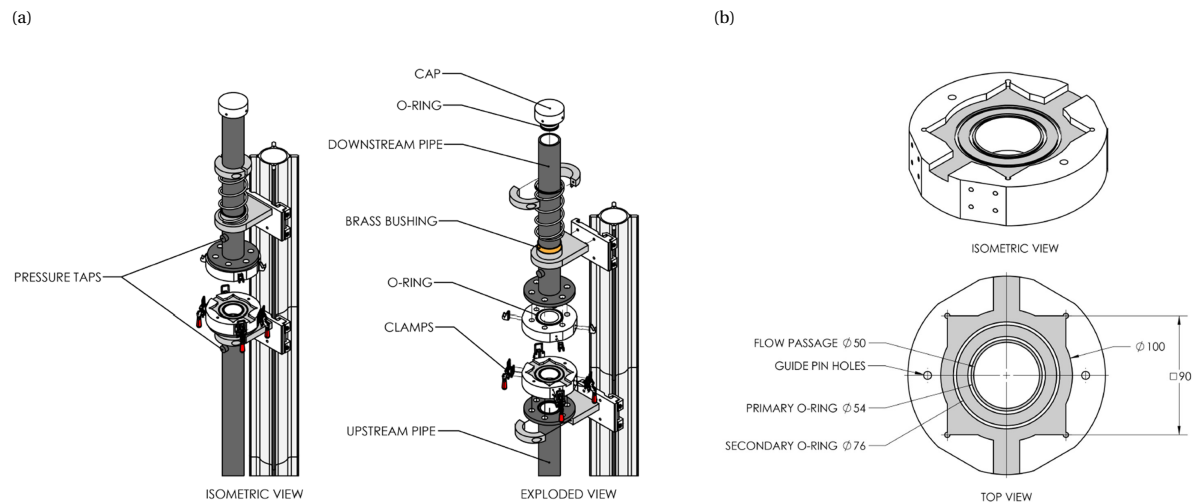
Technical drawings of permeability setup test section. (a) Assembly of test section sample holders, pipes and X-beam. Cap only used for leakage tests. (b) Test section sample holder. Grey shading indicates seating surface for permeability samples. Both images adapted from Hemmen (2018).
